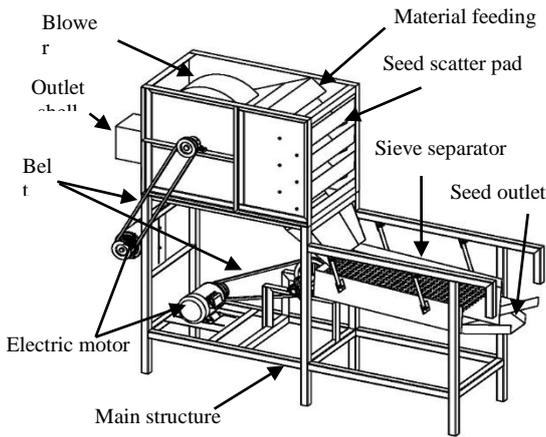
Draft of Cleaning and Grading Machine for whole kernels of Inca Peanuts.
